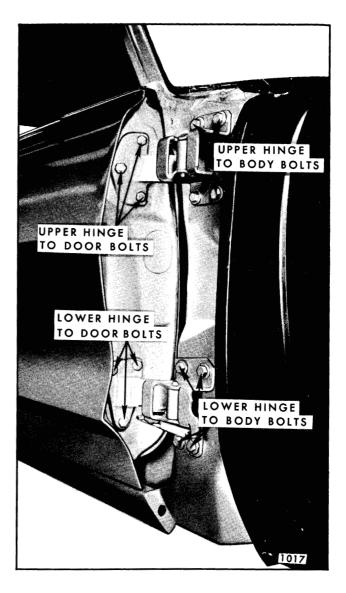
Front Door Hinge Attachment "B-C and E" Styles
